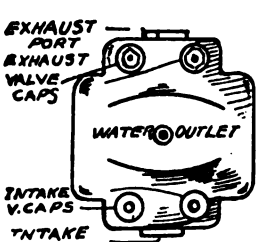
"T" type of cylinder. Note inlet ports on one side and exhaust ports on other side. Called "T" type because it is T-shaped.
